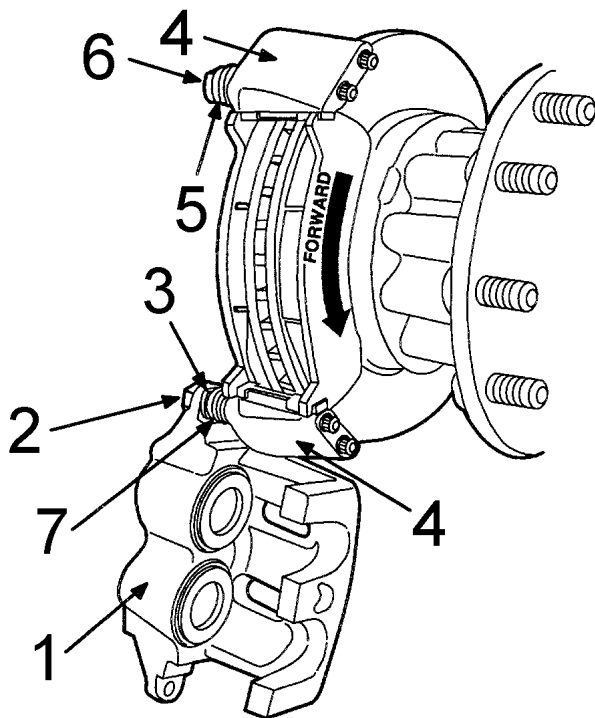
Rotate Caliper Open About Lower Hex Mounting Bolt and Guide Pin
